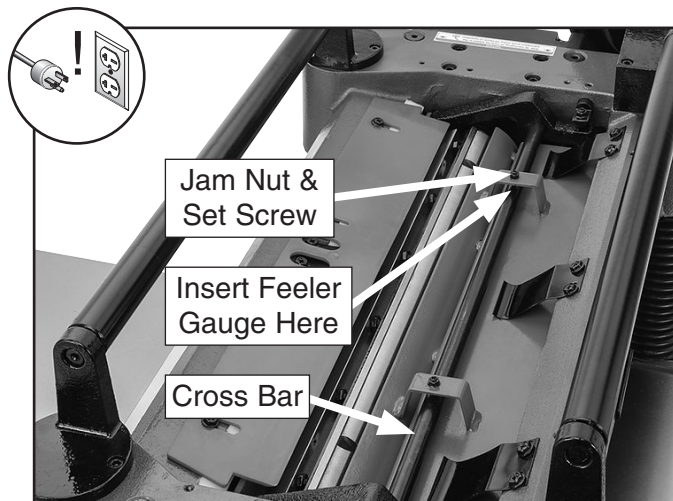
Feeler gauge location for adjusting chip breaker height when using wood blocks.
